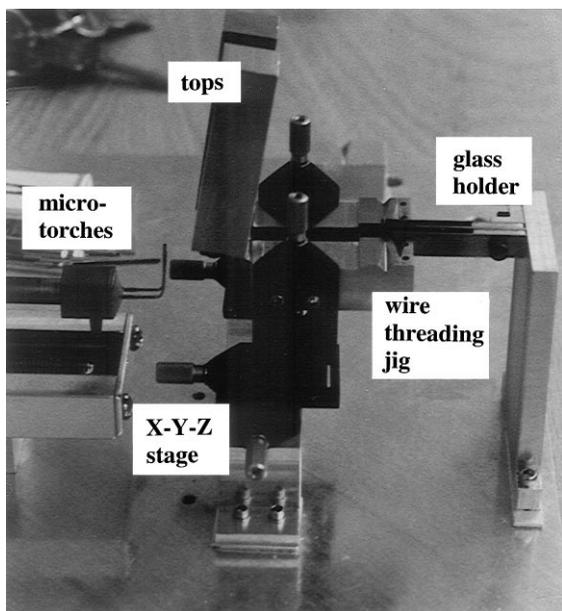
The wire-joint production fixture. Shown here are wire threading jig, glass holding fixture and micro torches. There are two wire threading jigs located at the left and right side of the glass holder. Each is mounted on a  $x$ - $y$ - $z$  stage to align it with the glass tube. The V shape grooves guide the wire and the tops are closed for threading operation. The wire-joint production operation is done under a microscope (not shown in the picture).
